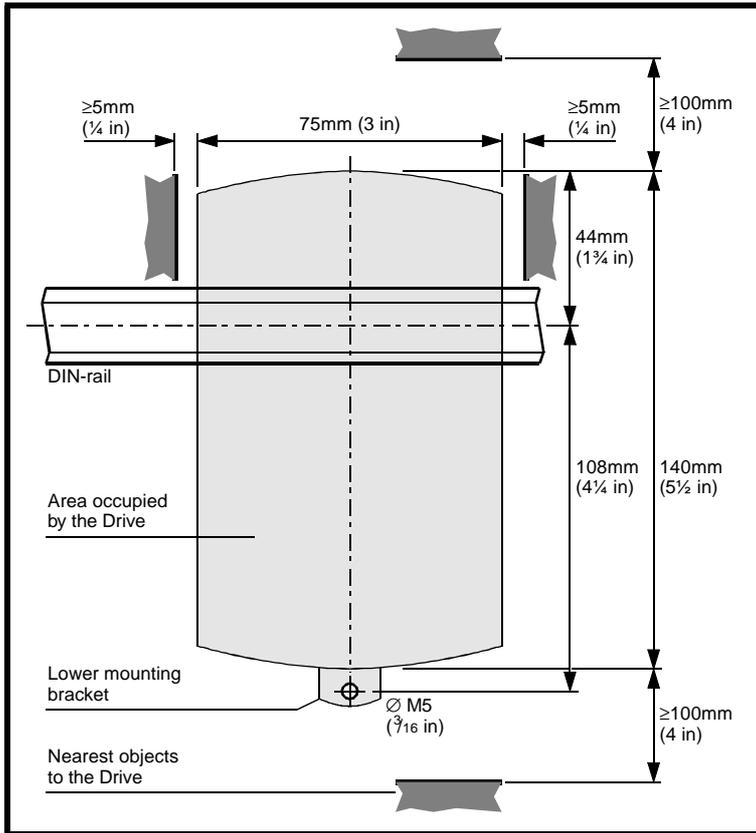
Preparing the panel/wall or surface for DIN rail mounting
